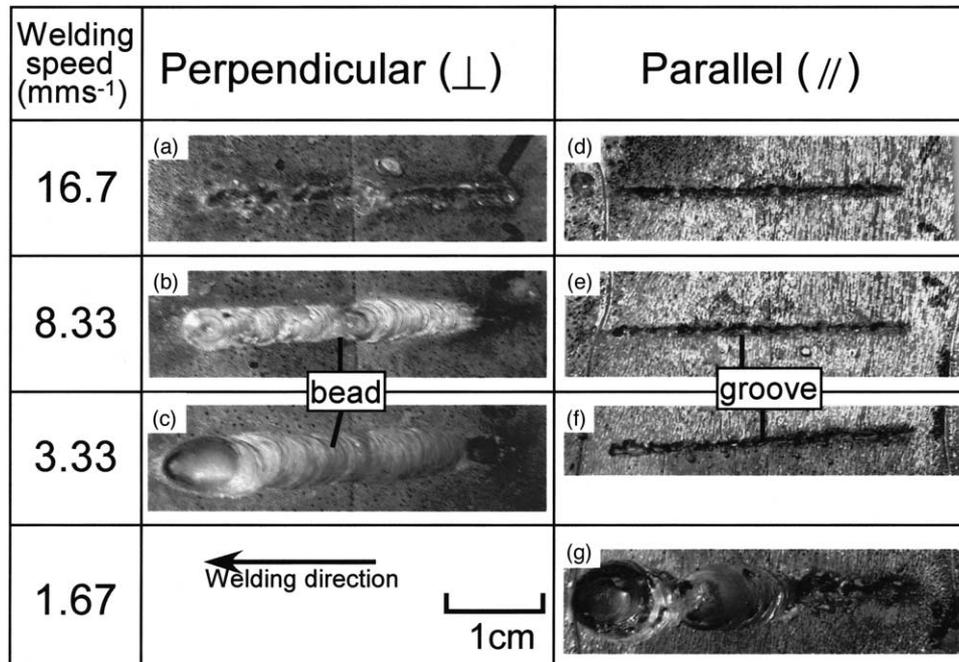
Top view of laser welded specimens at different welding speeds with 3.2 kW constant laser power in 5 mm thickness, in (a)–(c) perpendicular and (d)–(g) parallel to the pore growth directions. Welding speed: (a) and (d) 16.7 mm s⁻¹, (b) and (e) 8.33 mm s⁻¹, (c) and (f) 3.33 mm s⁻¹ and (g) 1.67 mm s⁻¹.
